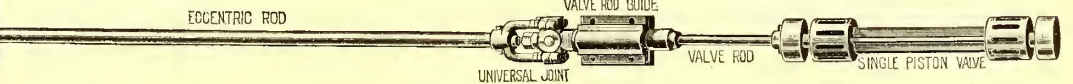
VALVE GEAR—AMERICAN ENGINE.
